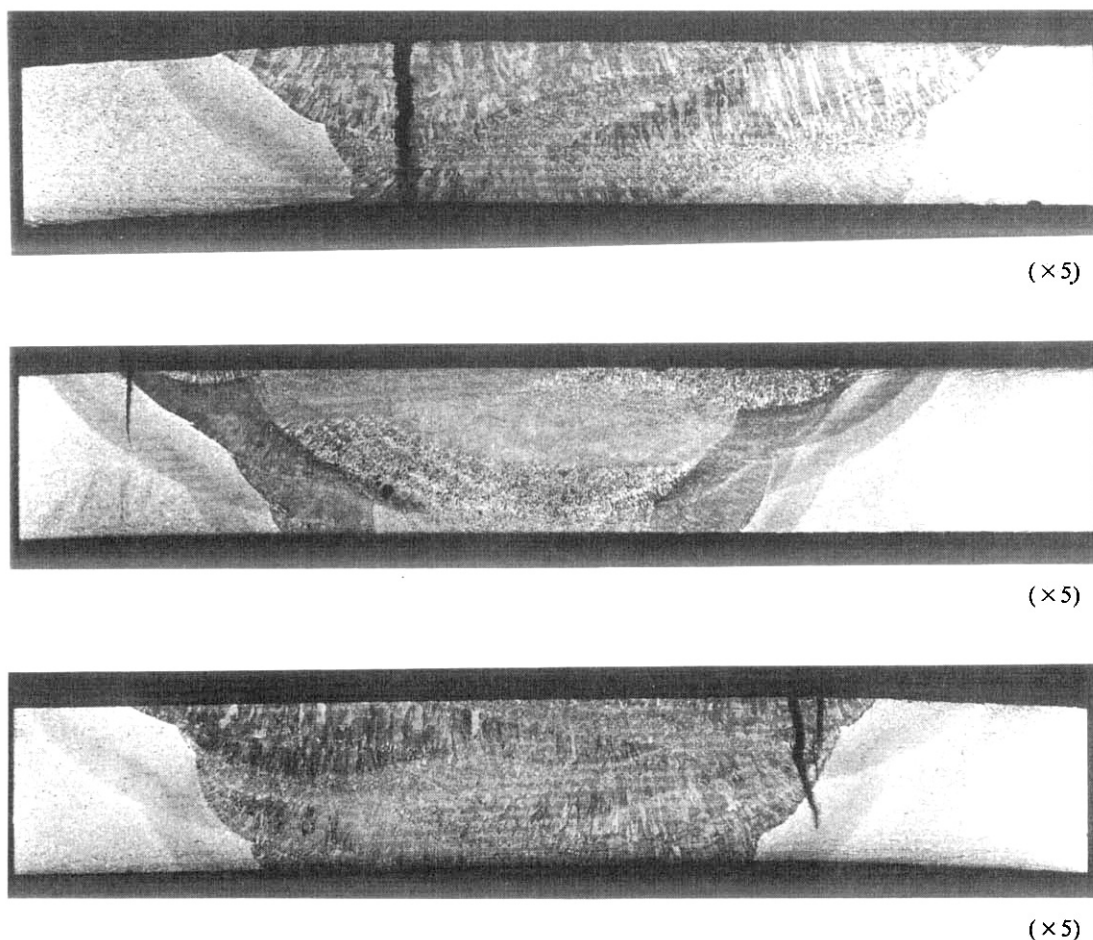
Cross sectional view of sulfide cracking of FCA weldment after SSCC Test (Specimens from cap pass area)
